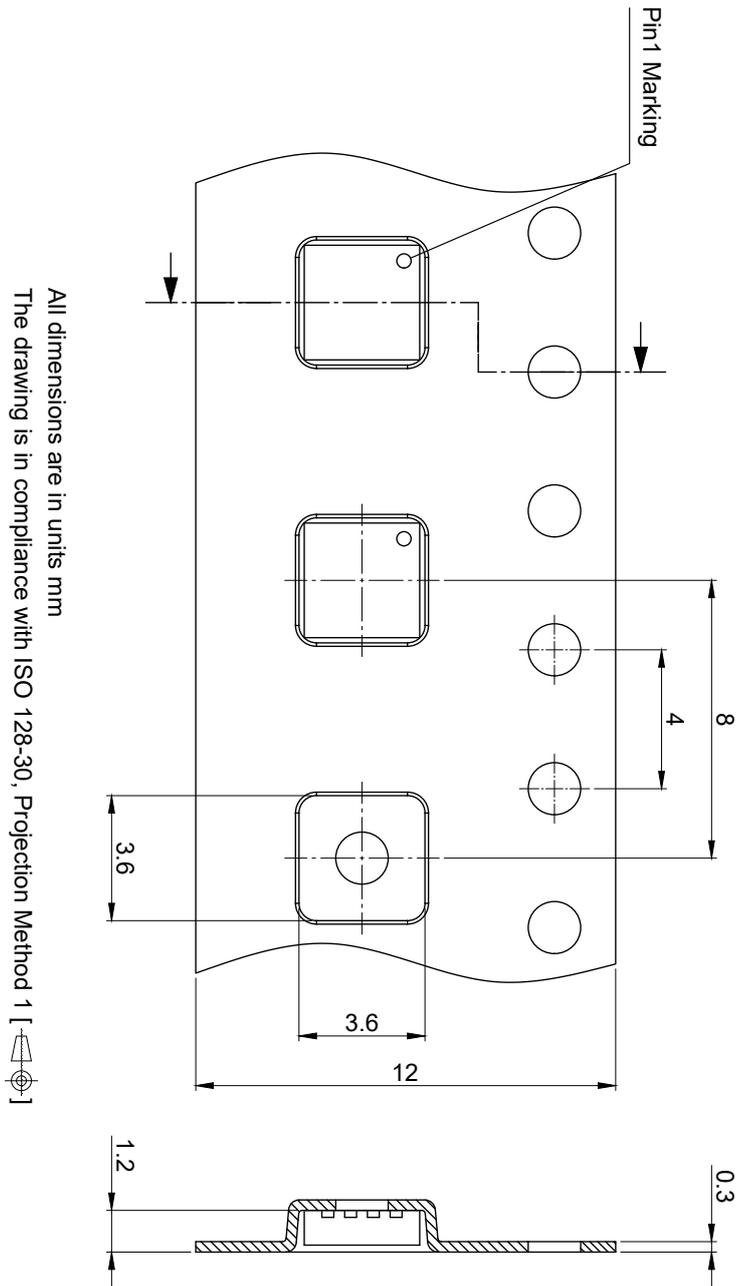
Packaging variant PG-WHTFN-9, dimensions in mm
